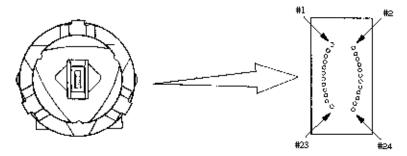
Arrangement of the head pins, View from the tip of the printhead
